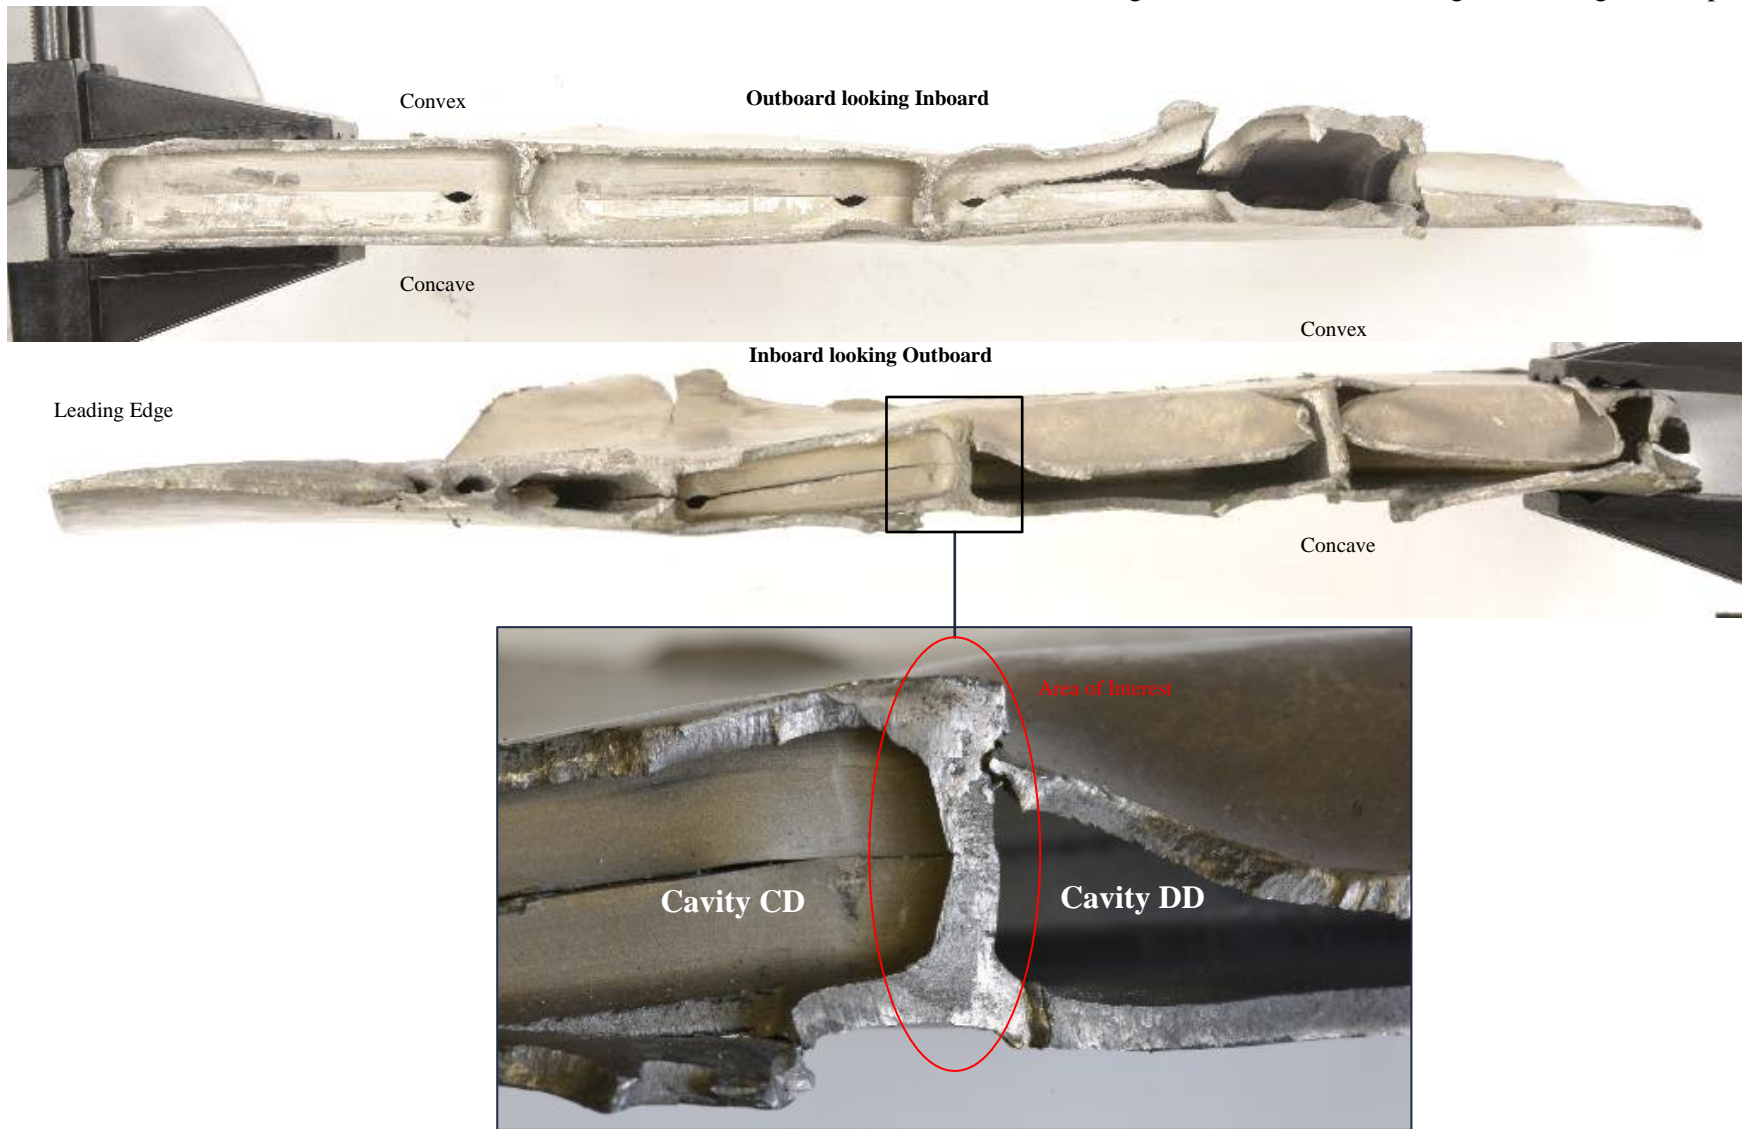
Binocular microscope inspection of the fracture surfaces identified possible fatigue on the inboard side of the fragment between cavities CD and DD.
